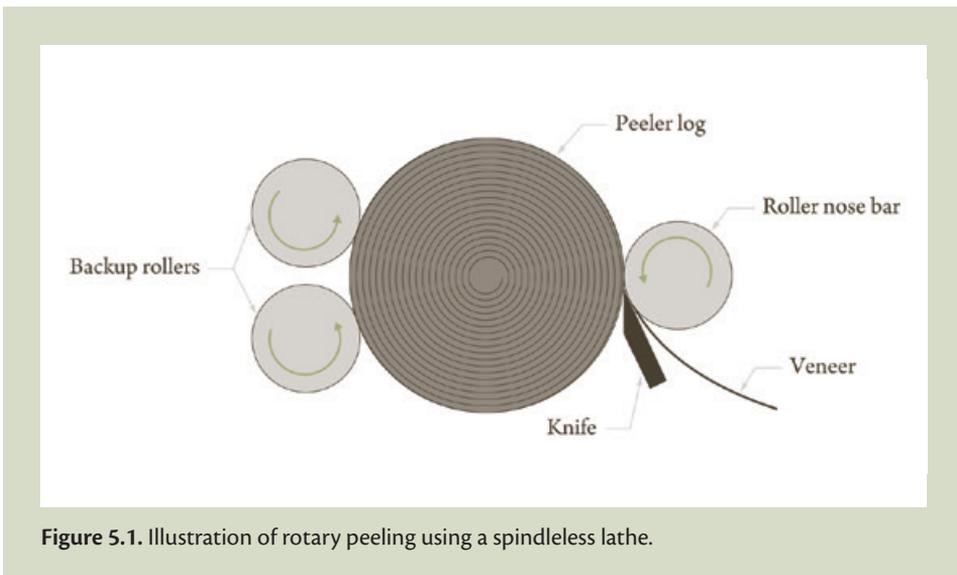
Illustration of rotary peeling using a spindleless lathe.
